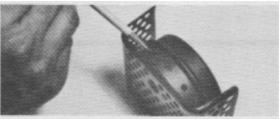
Exhaust exit holes in muffler should be free from carbon build-up. Suggest to use small wire to clean this area when necessary.
